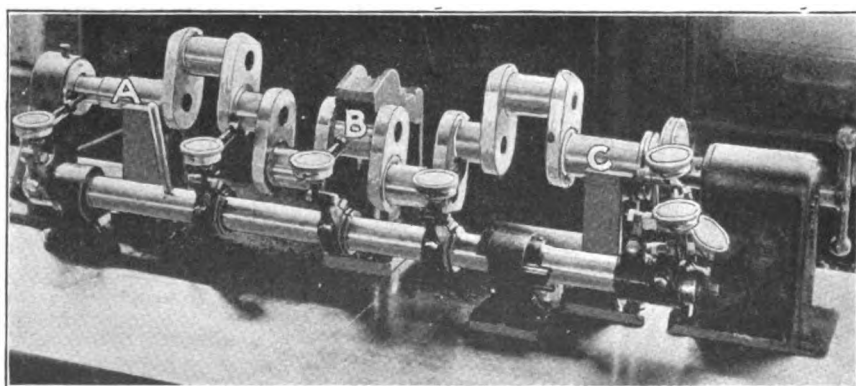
INSPECTING LINCOLN CRANKSHAFT
